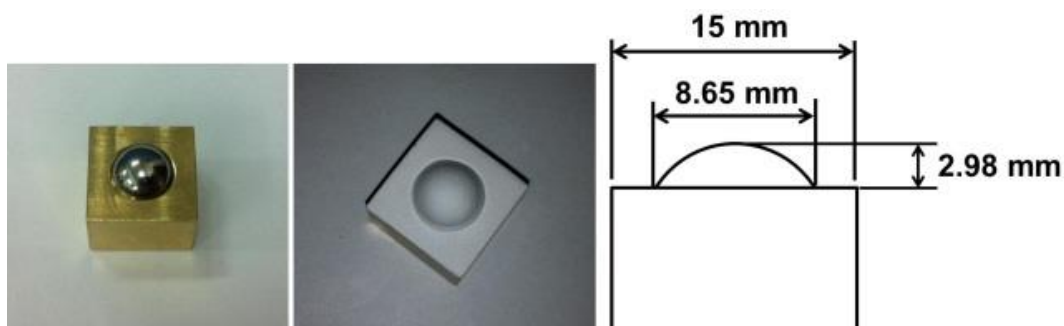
Calibration jig: (left) spherical steel ball with a cube, (middle) coated jig, (right) dimensions of the jig
